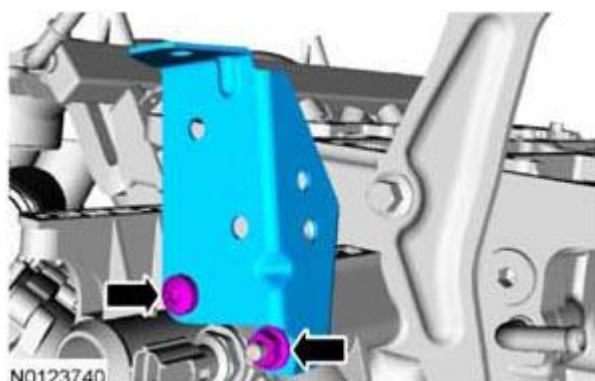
Locating Coolant Outlet Bracket Nut And Bolt
